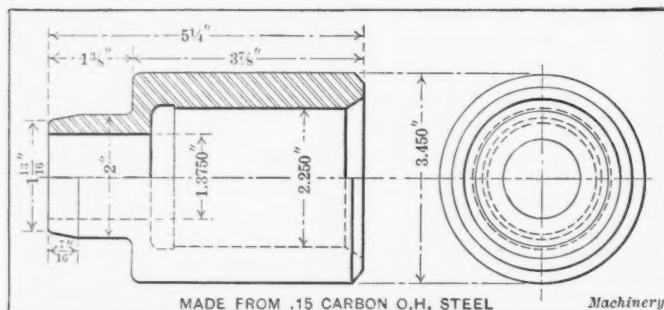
Transmission End of Drive Shaft Universal which is completely turned in R. K. LeBlond Engine Lathe
